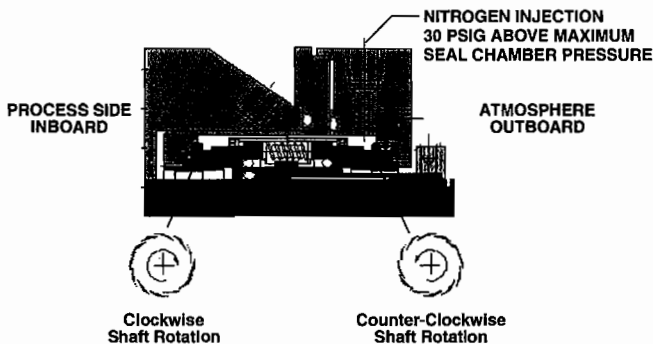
Noncontacting Dual Pressurized Gas Seal for ANSI Large Bore Pumps.
